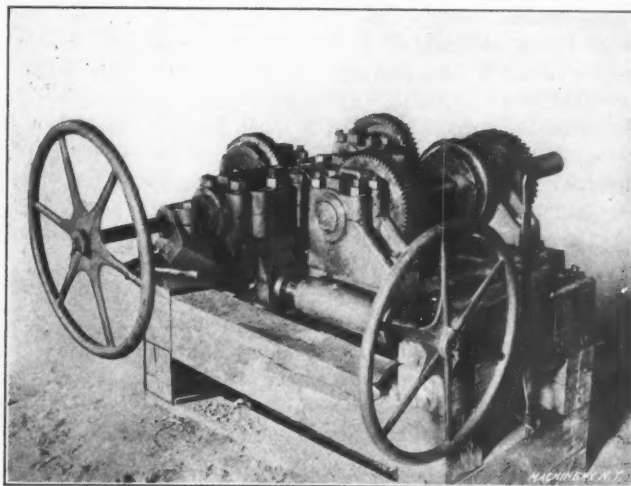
Machine for Forming the Teeth of Gears by a Rolling Process
